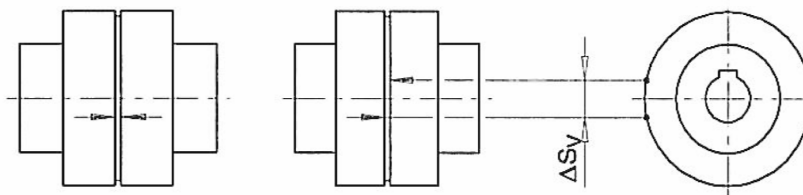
Testing the rubber elastic elements of the couplings Flender N-480 and A-EUPEX RUPEX RWN 710
